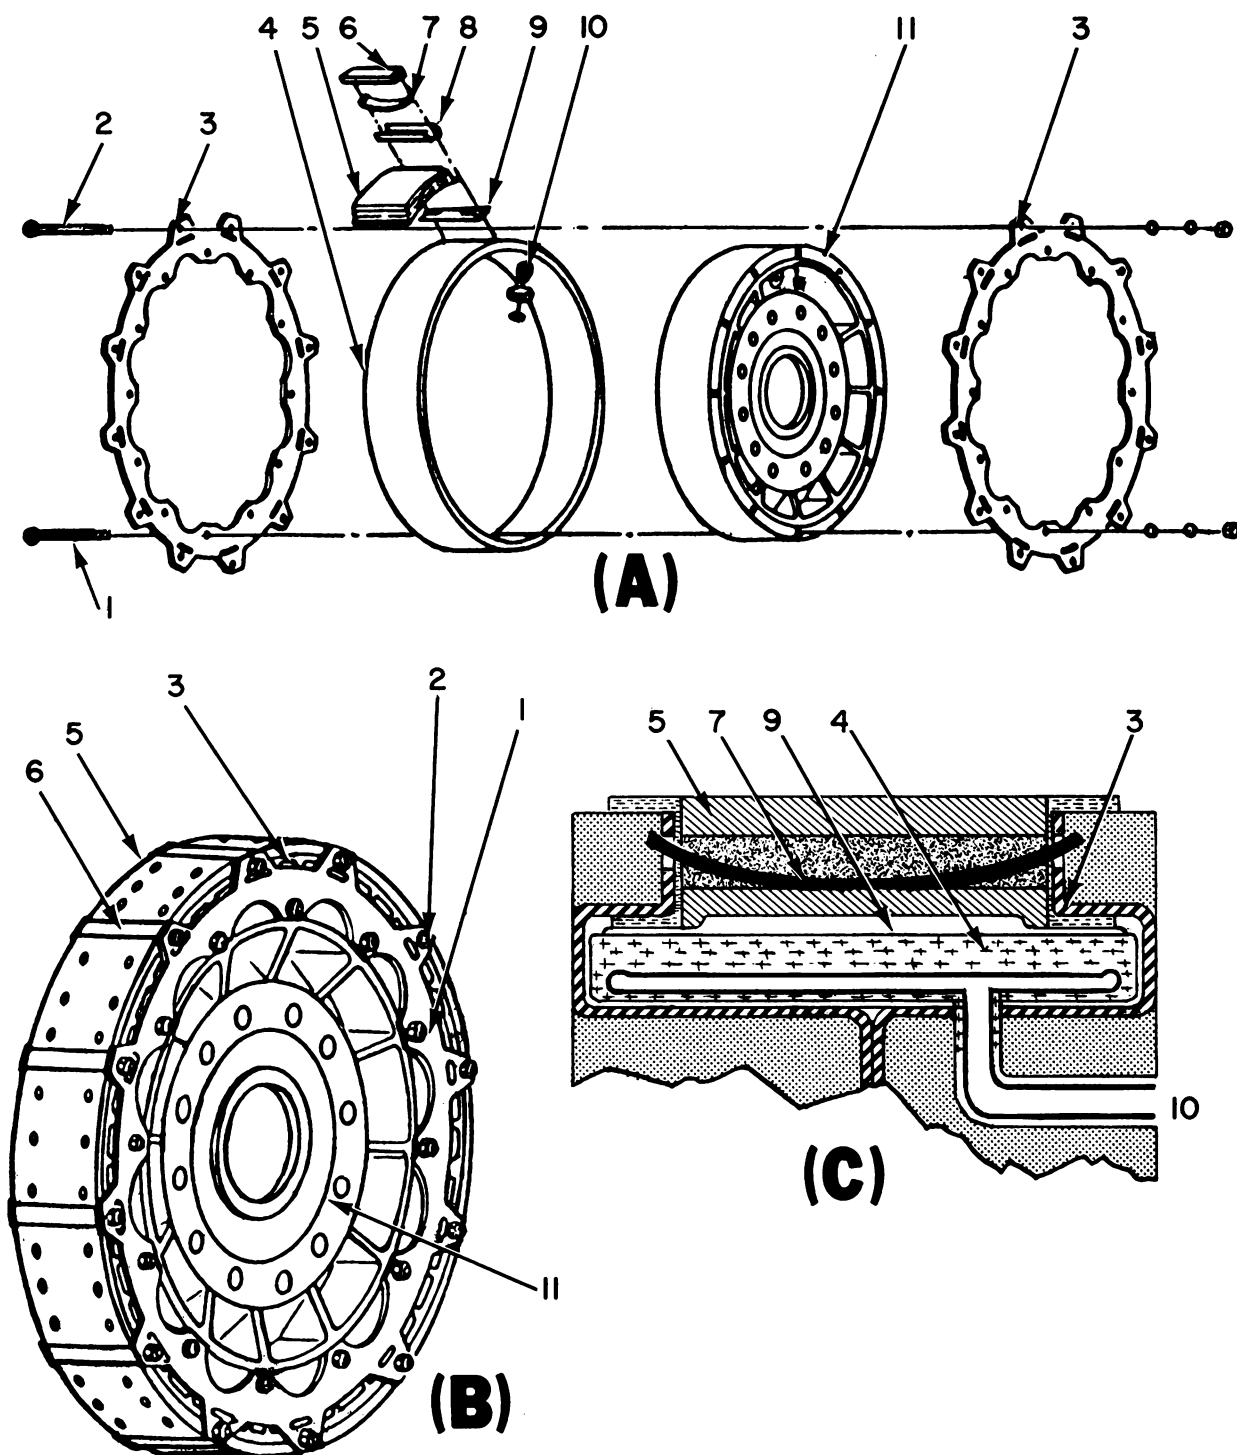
Expander tube brake. (A) Exploded view; (B) assembled view; (C) cross-sectional view.
